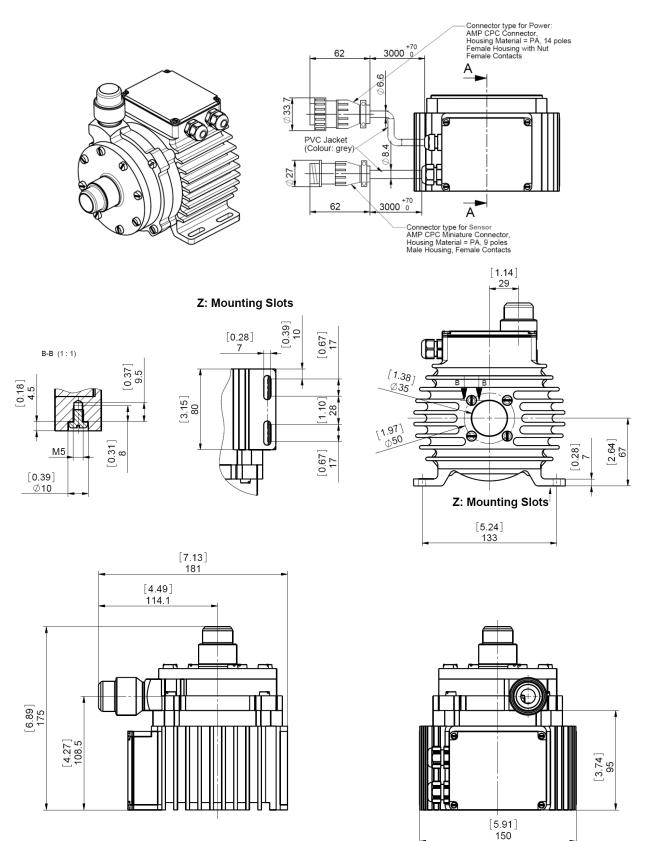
Basic dimensions (in mm and [inch]) of motor LPM-600.2 with pump head LPP-600.1 (for other configurations refer to according drawings)
